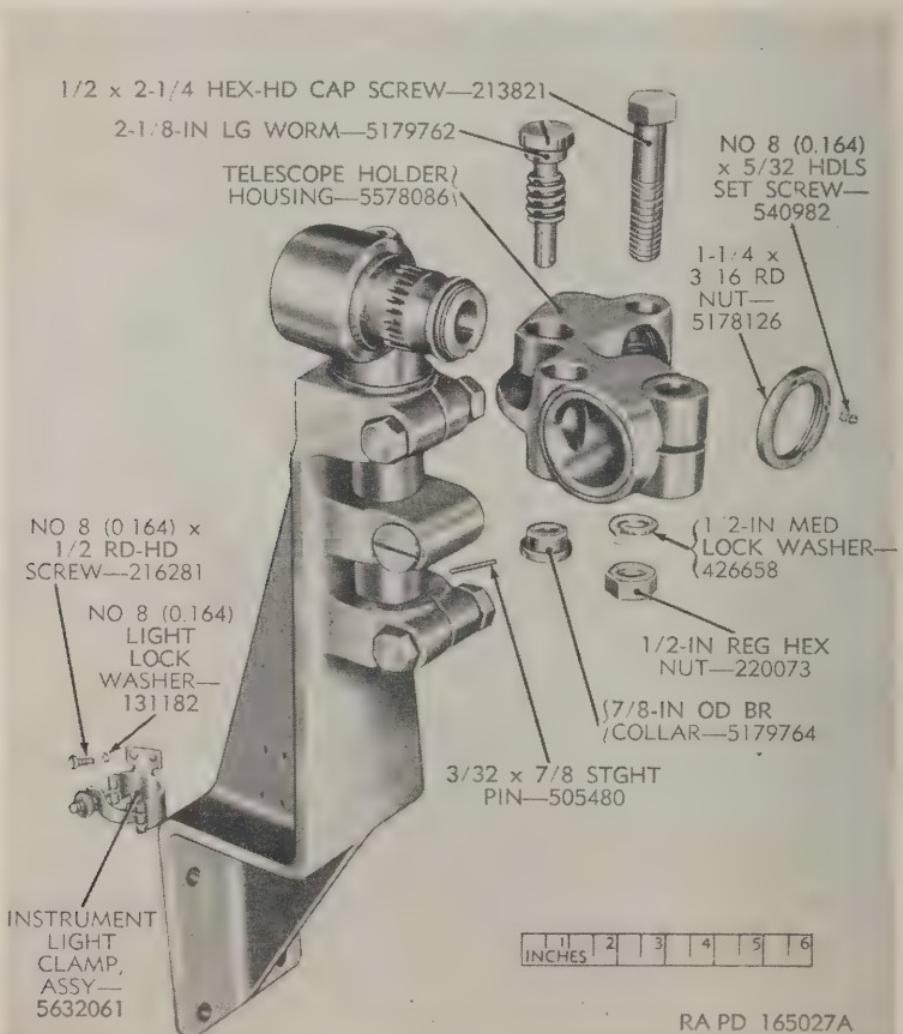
Telescope mount M46—removal of the telescope holder housing.
